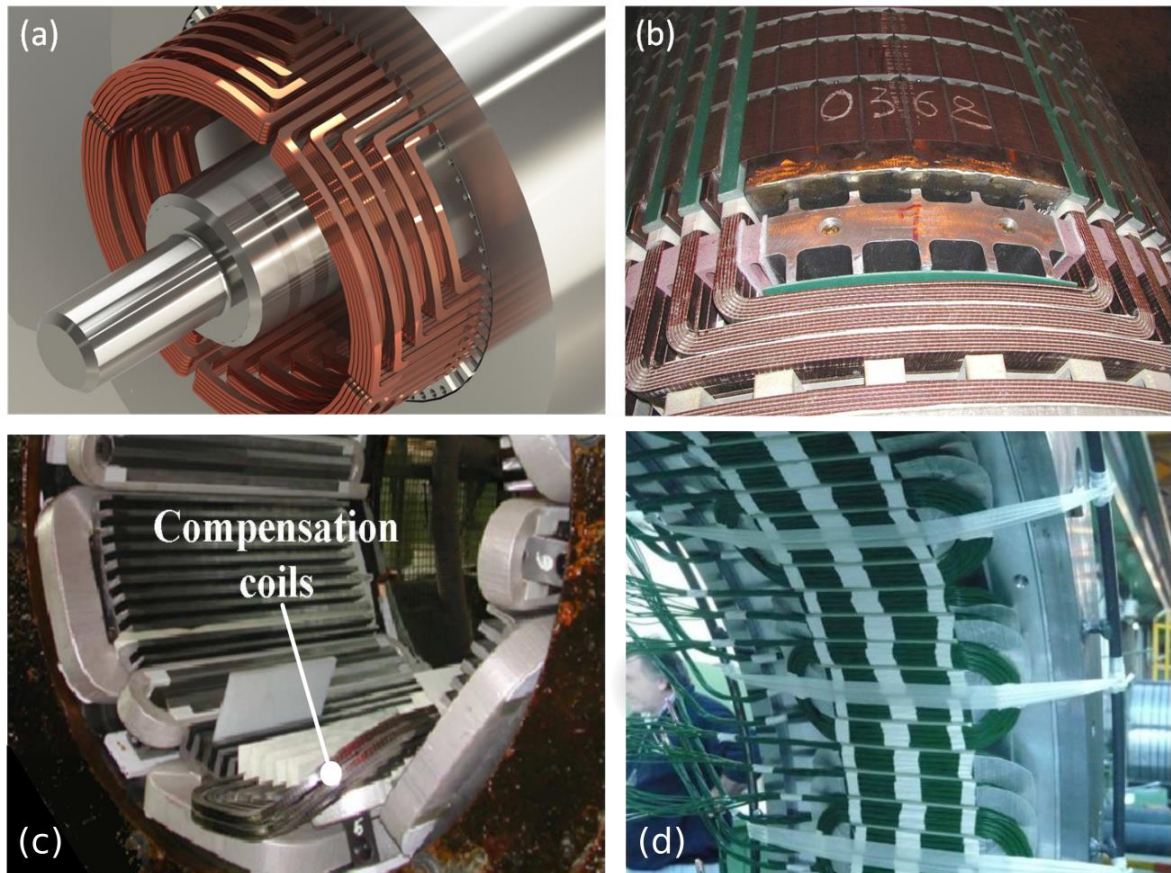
Examples of concentric windings in electric machines during manufacturing: (a) rendered 3D image of a round rotor synchronous machine field winding (b) Real image of a turbo-alternator rotor with visible rotor windings (c) Stator compensator windings of a dc machine (d) stator windings of a slotless SPM machine
